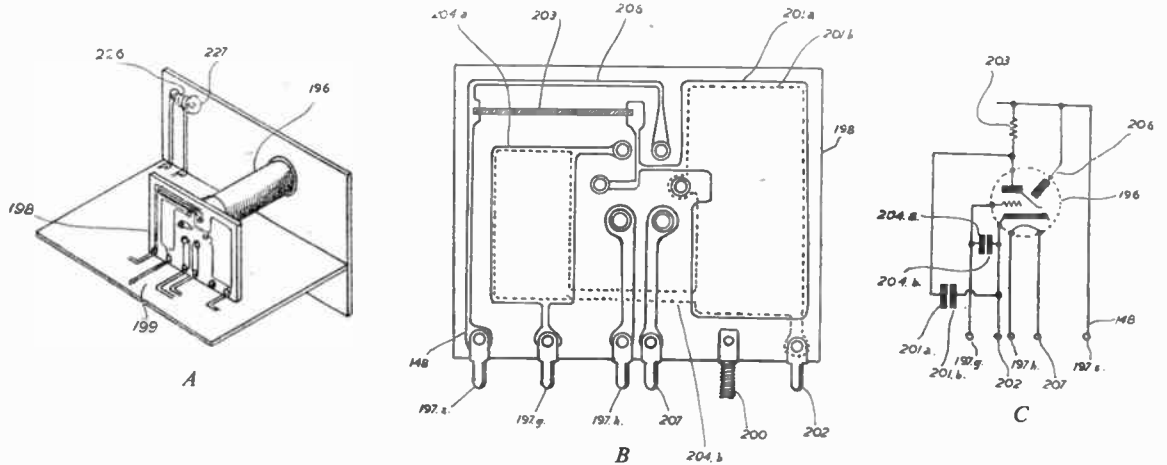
Use of right-angled assembly: (A) Plug-in type sub-assembly. (B) Plug-in panel. (C) Circuit of A and B.
